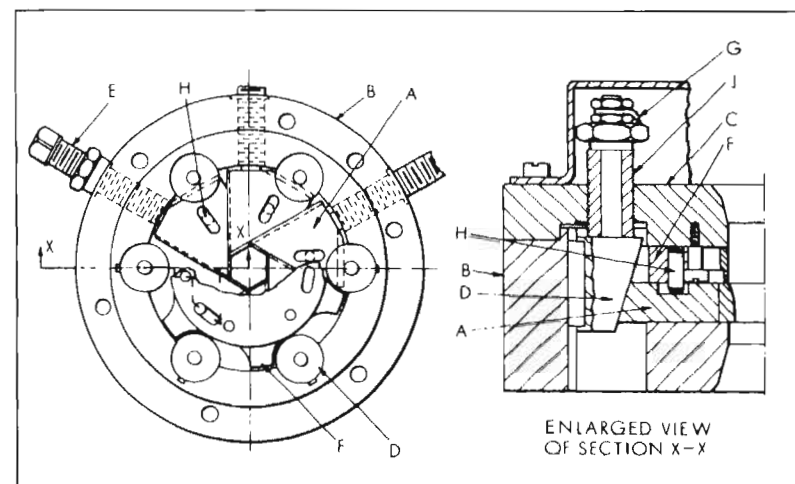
Plan view and enlarged cross-section of the die showing the arrangement of the various components.
